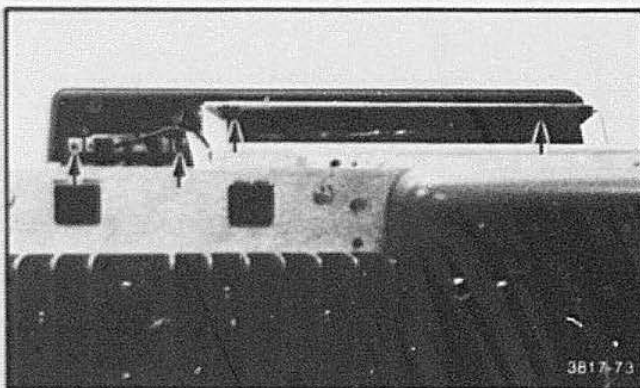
Bezel Upper Mounting Screws and Refresh Intensity Control.
